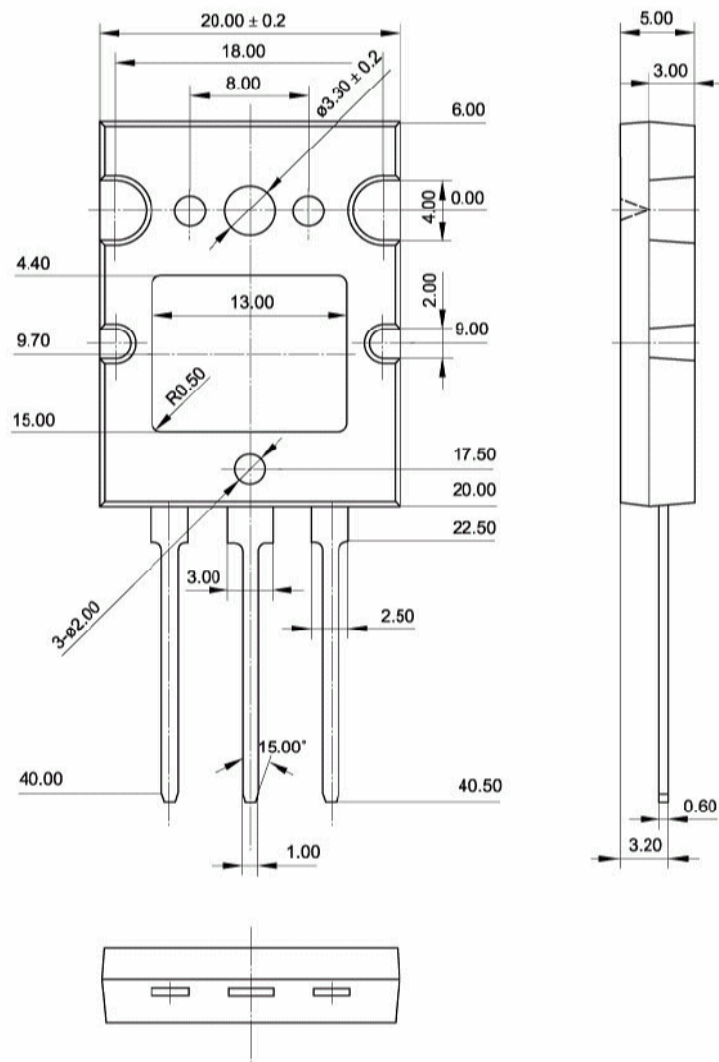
Outline dimensions (unindicated tolerance:  $\pm 0.50$  mm)
